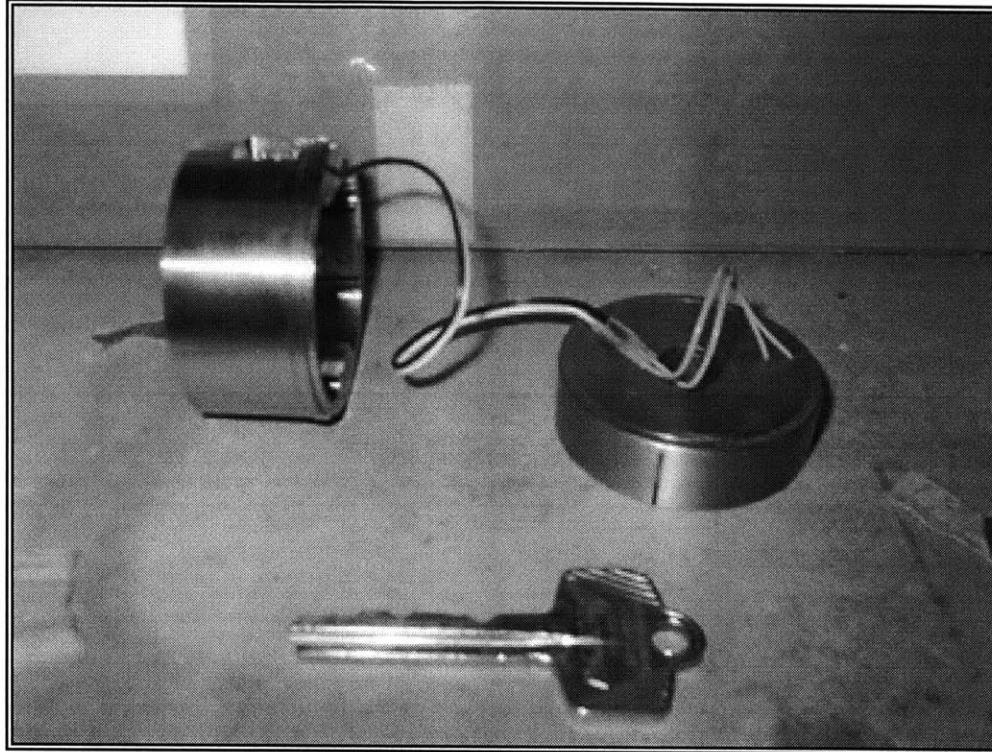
In advance of welding, the inlet valve is wired to the high pressure reservoir piece because this connection cannot be made later
